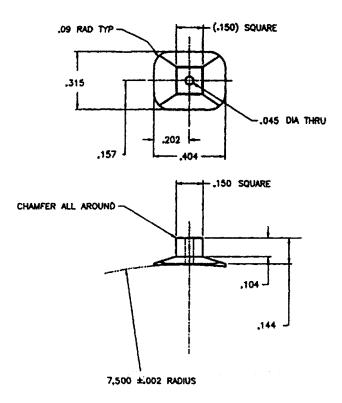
Design of a boss suitable for bonding to the rim of a 15.0 in. (38.1 cm) diameter mirror for mounting in the fashion depicted in Fig. 9.34.
